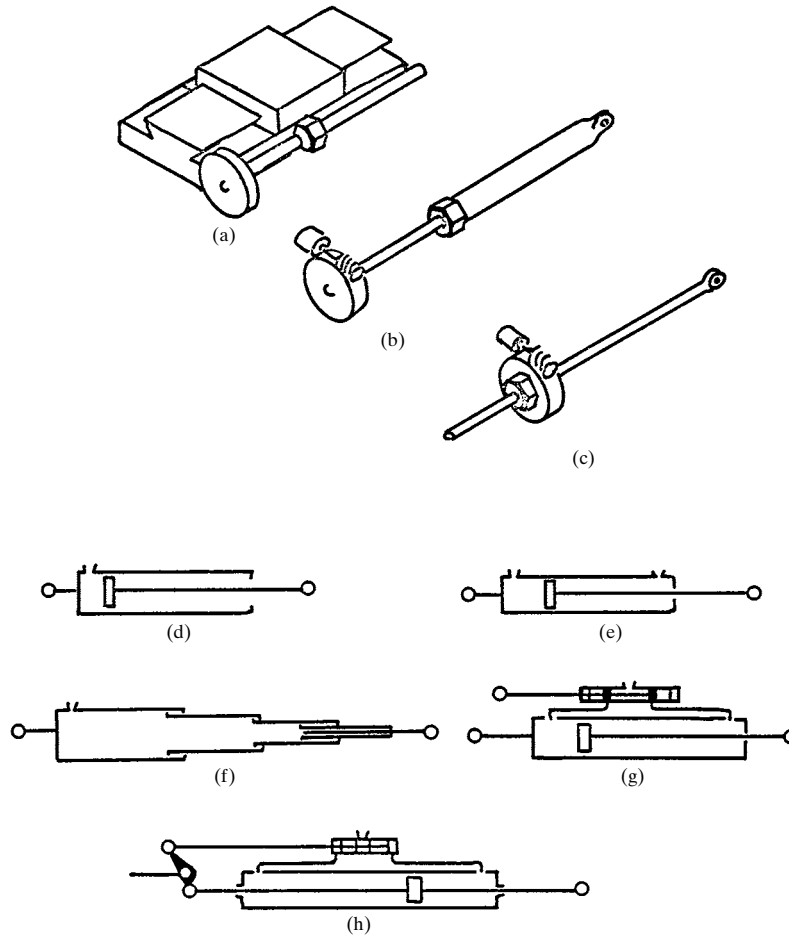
Linear actuators. These are devices that cause a straight-line displacement between two machine elements. (a) Lead screw; (b) worm gear with stationary nut; (c) worm gear with stationary screw; (d) single-acting hydraulic cylinder; (e) double-acting hydraulic cylinder; (f) telescoping hydraulic cylinder; (g) hydraulic cylinder with positional feedback; (h) hydraulic cylinder with floating link feedback.
